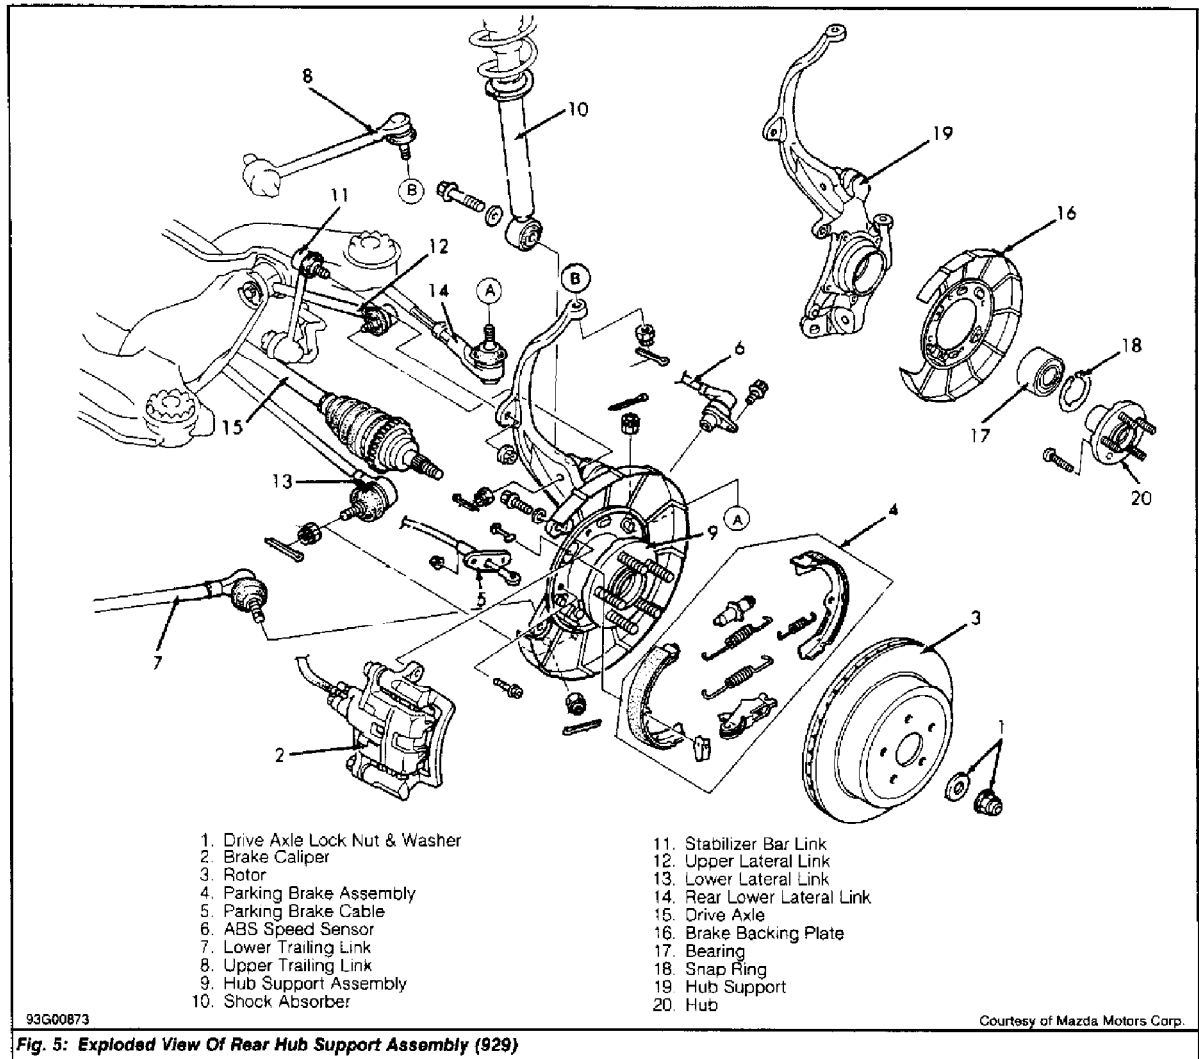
Exploded View Of Rear Hub Support Assembly
